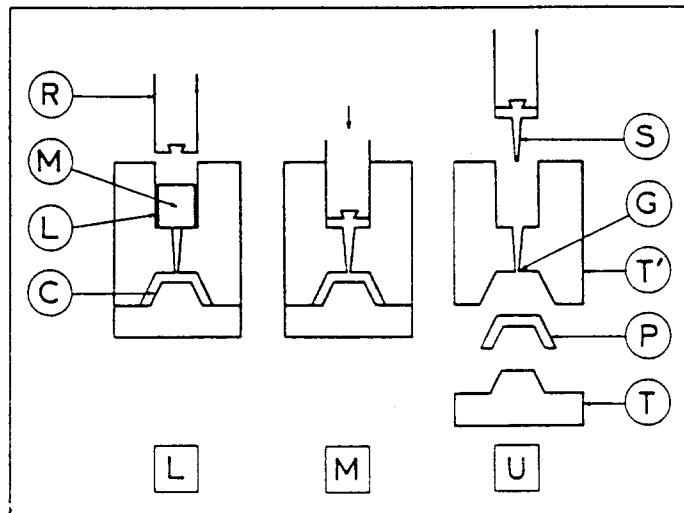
• Pot transfer molding • [L] Loading; [M] Molding; [U] Unloading; (C) Cavity; (L) Pot; (M) Material charge; (R) Transfer piston; (S) Sprue (scrap); (G) Gate; (T),(T') Mold halves; (P) Product
